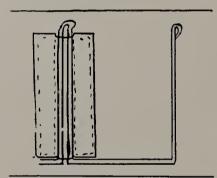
The "D" section formed in stainless steel tape is welded to the band to form a tube into which the auxiliary spring can be inserted.
